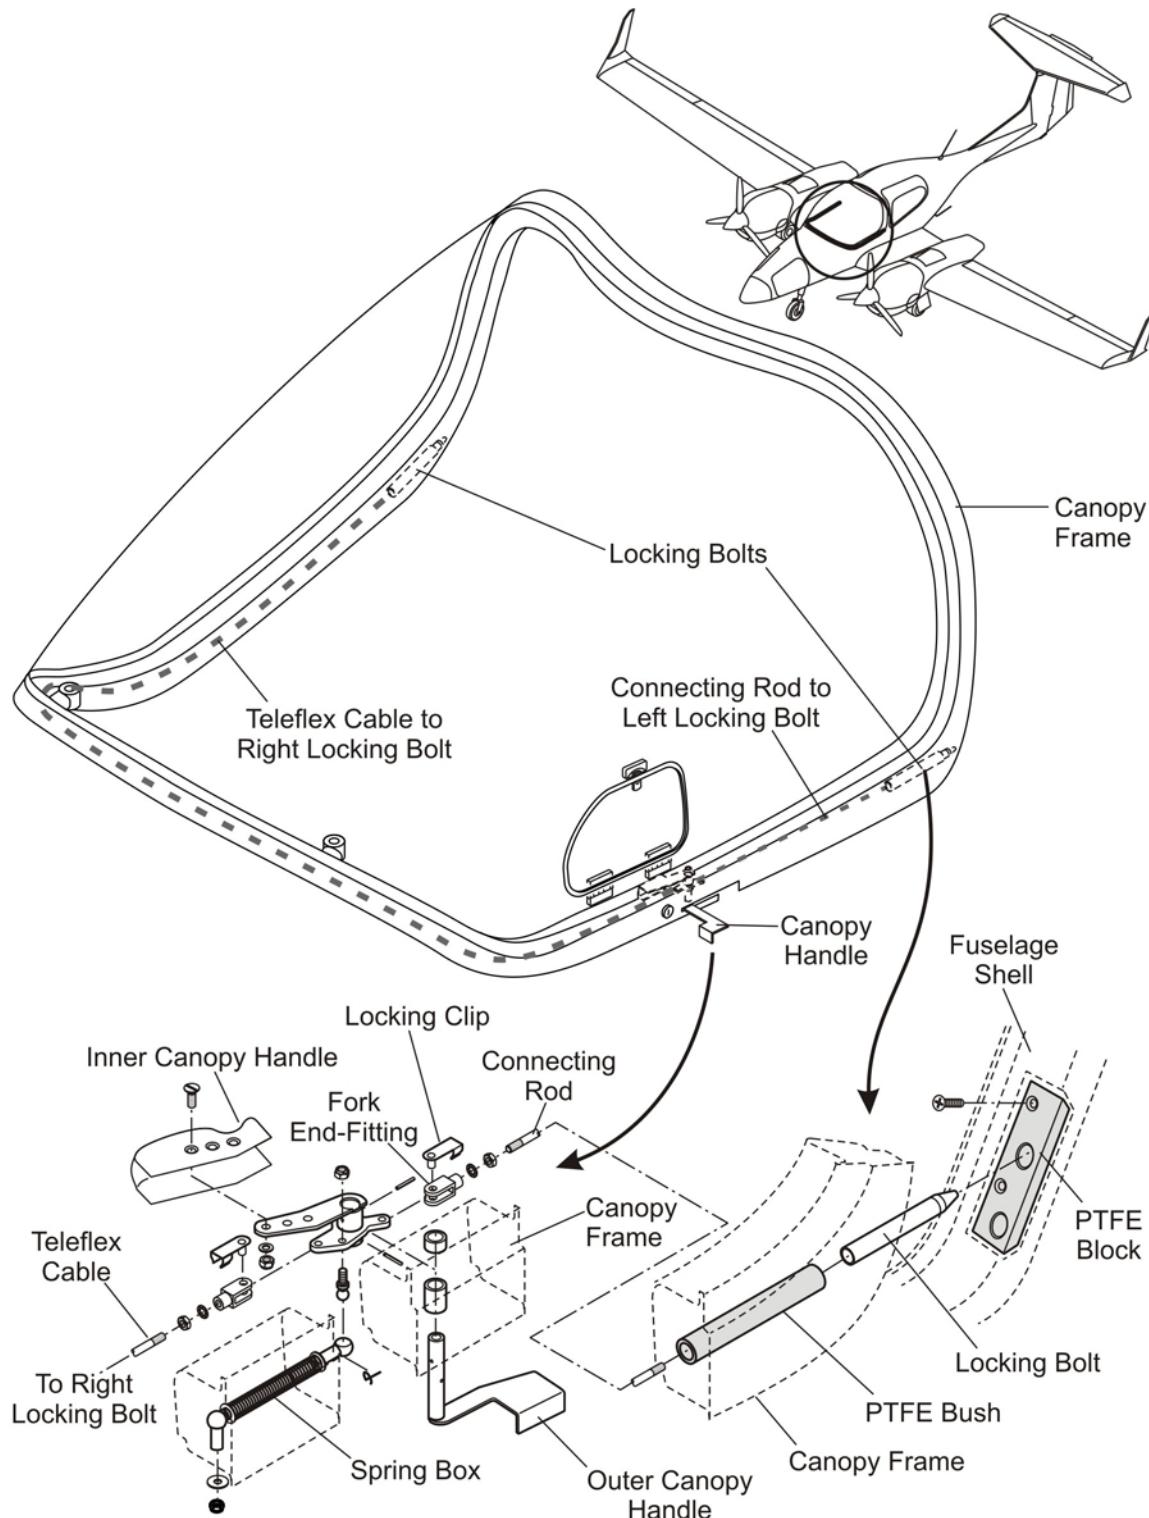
Canopy Locking Mechanism, MÄM 42-097 Not Carried Out
